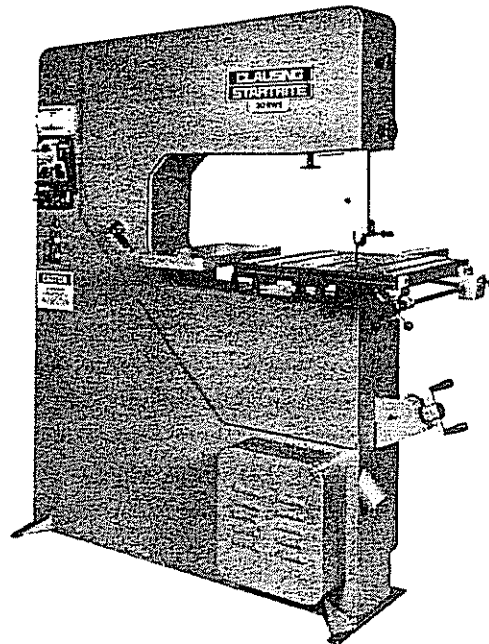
Band saw for sheet metal cutting (courtesy Clausing Startrite)
